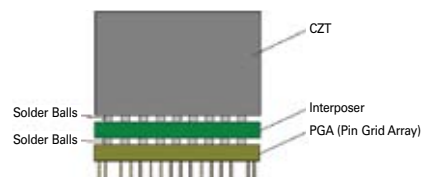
Representation showing the stack-up of the CZT, interposer and PGA connected with solder balls.
